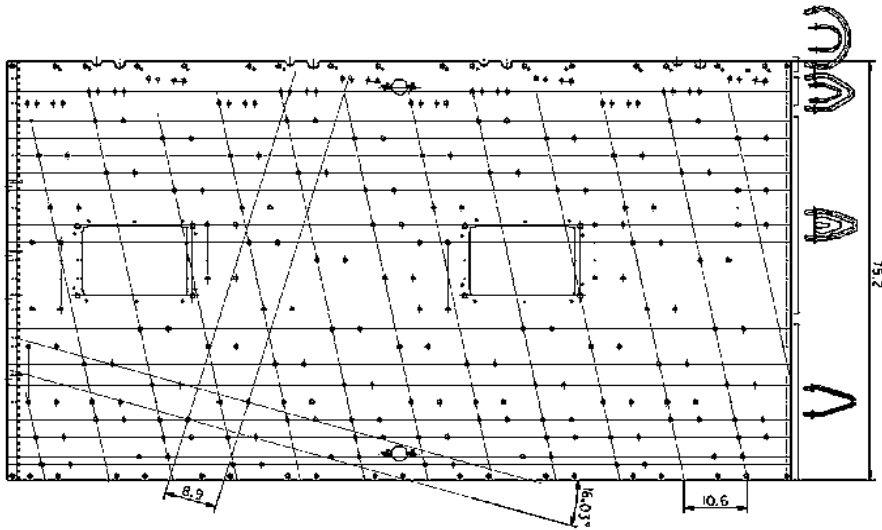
Threshing tooth arrangement of the 4 row head feed combine of threshing drum length of 810 mm.
